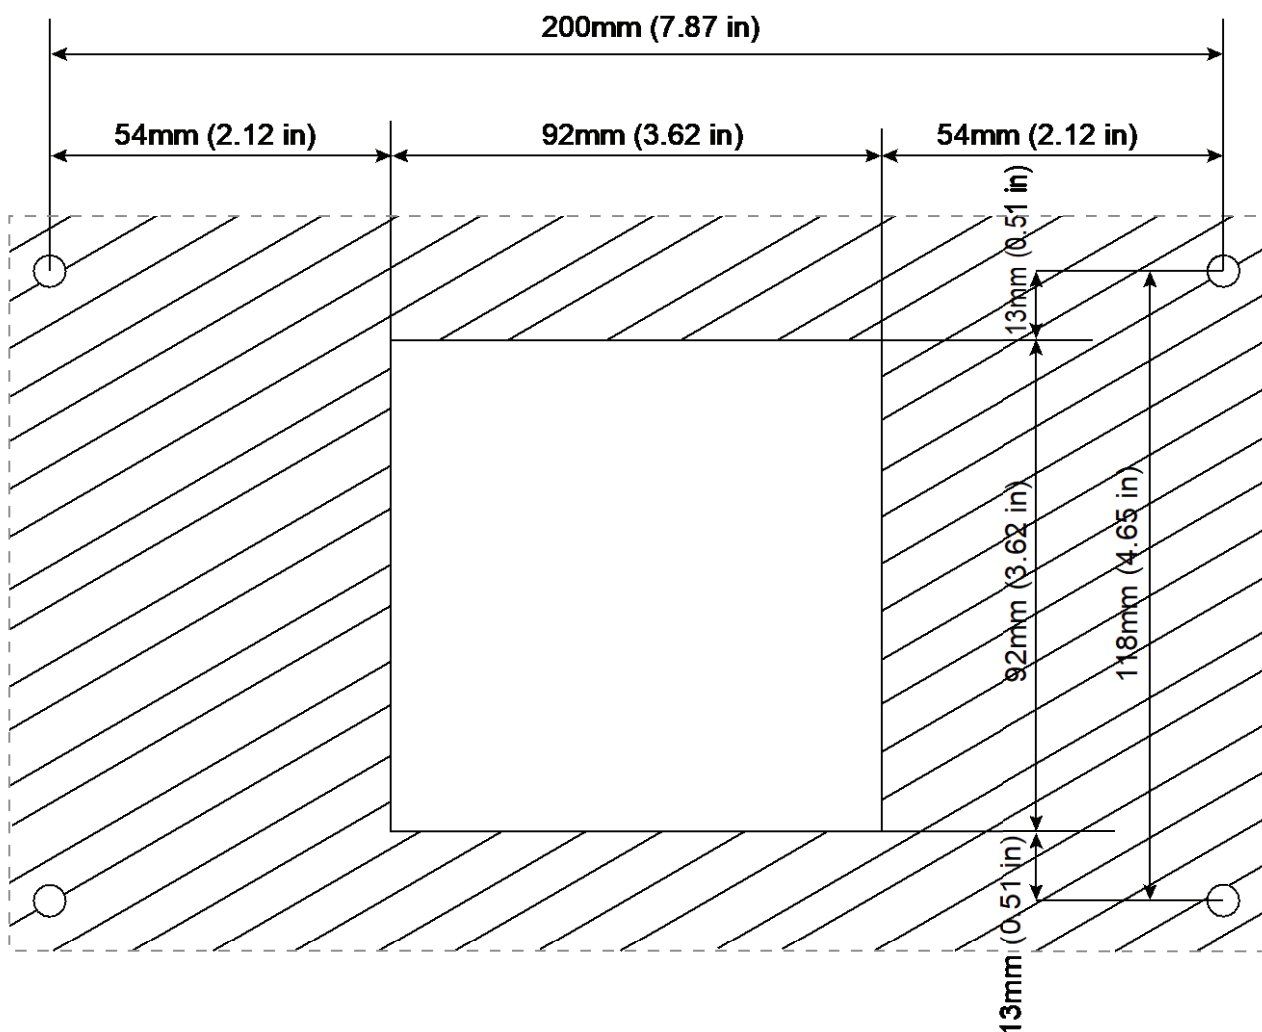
Panel cutout and dimensions for Panel Mounted Device
